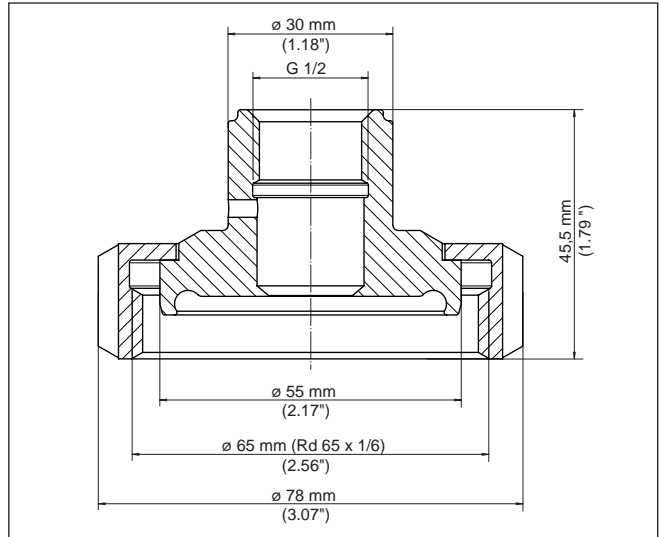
Dimensions hygienic adapter G 1/2 (DIN 3852-X) on slotted nut DN 40 (DIN 11864-1) PN 40 - Cone seal
